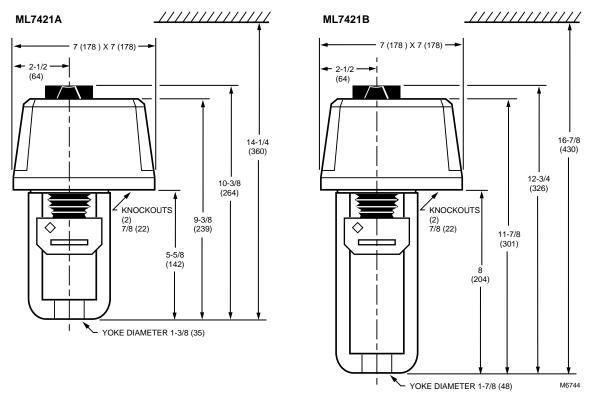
Approximate dimensions of ML7421A,B Electric Linear Valve Actuator in in. (mm).
